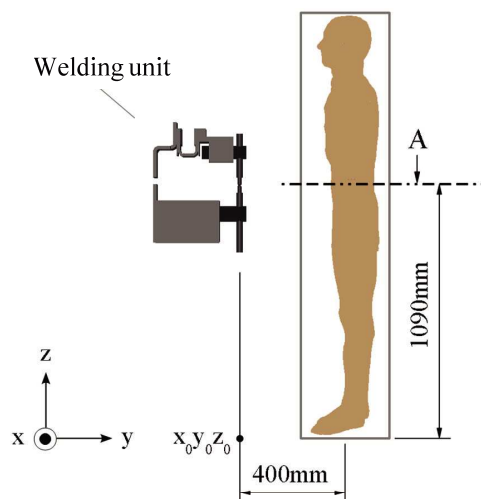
Example for positioning of the human body model in front of the welding circuit of resistance welding equipment.
